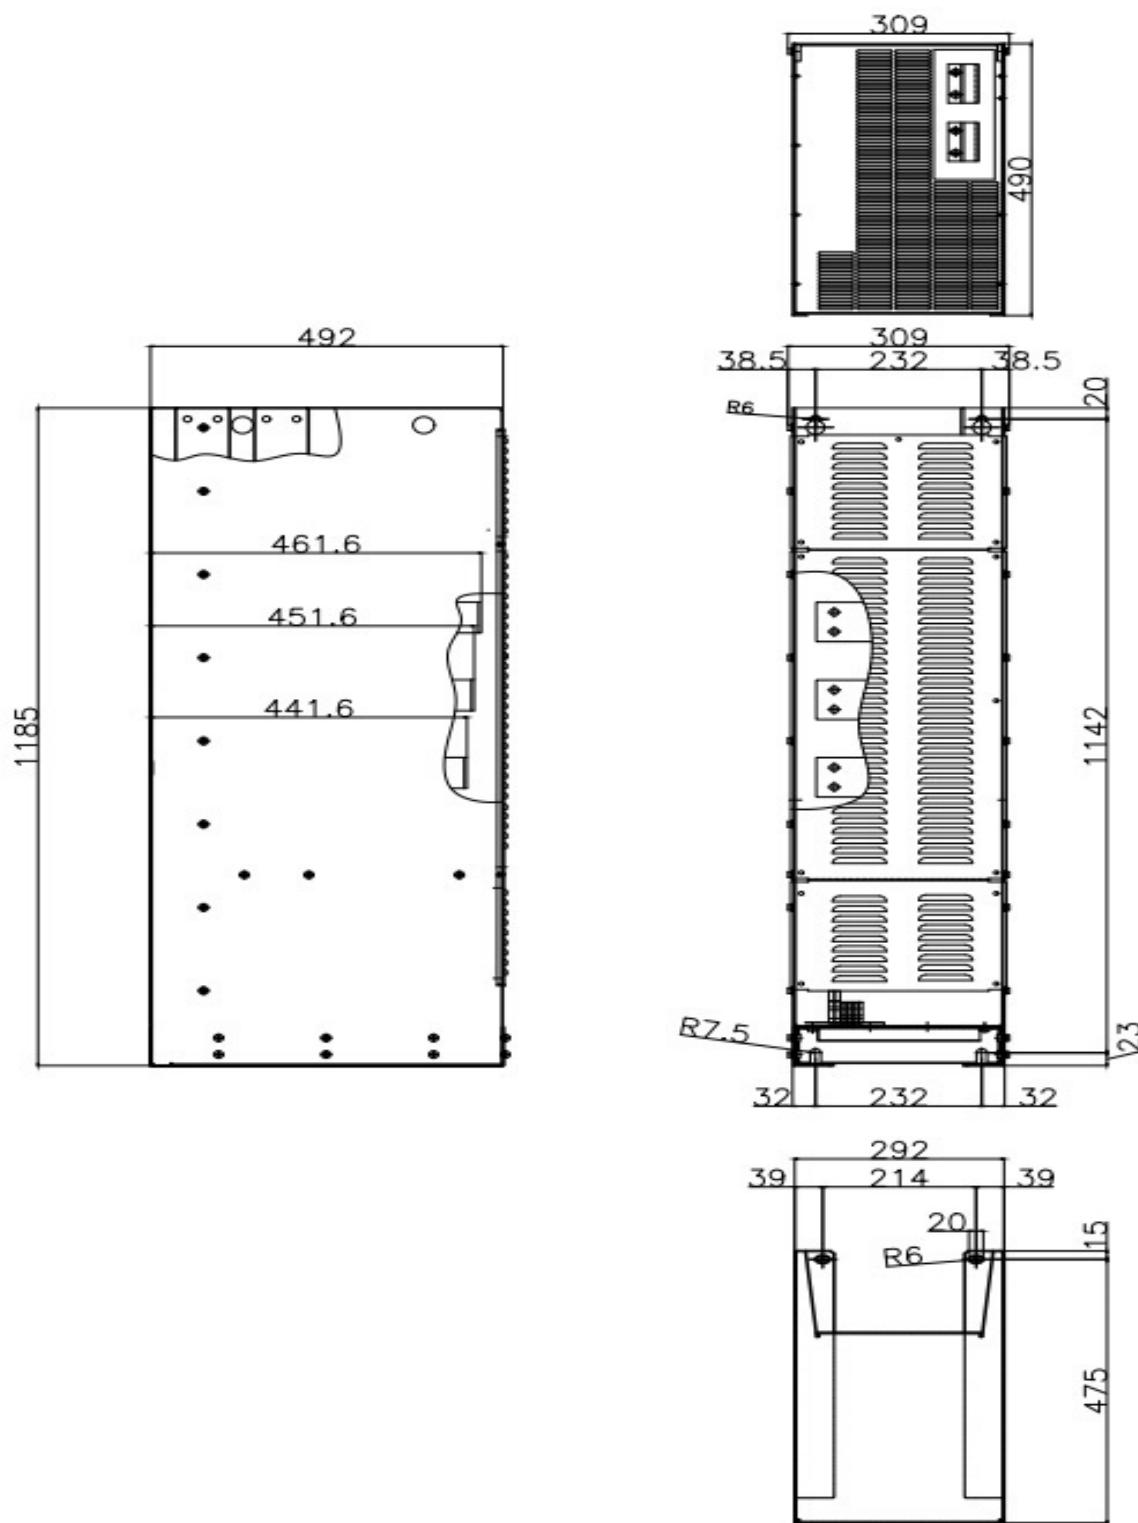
(2) 400VD4N(K10C)Rectifier unit external dimension
